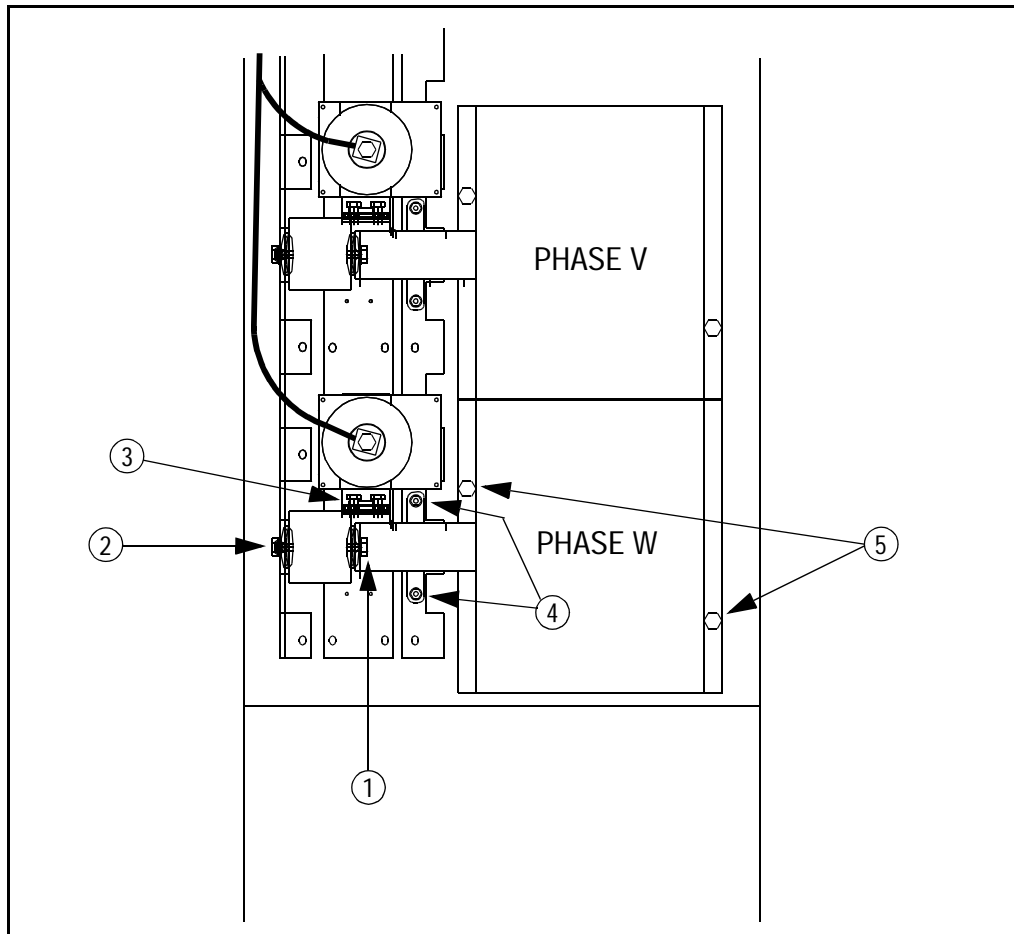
IGBT Module Assembly Mounting Bolt Locations
